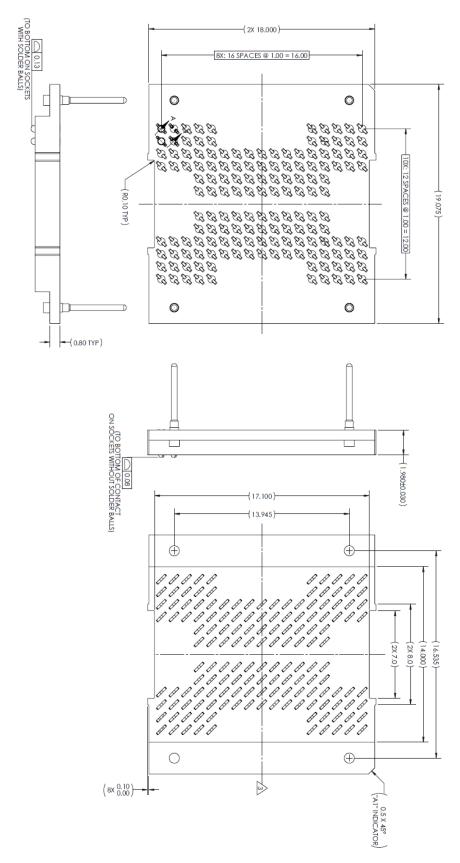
152 Ball Custom Target Socket Mechanical Dimensions (sold separately)
